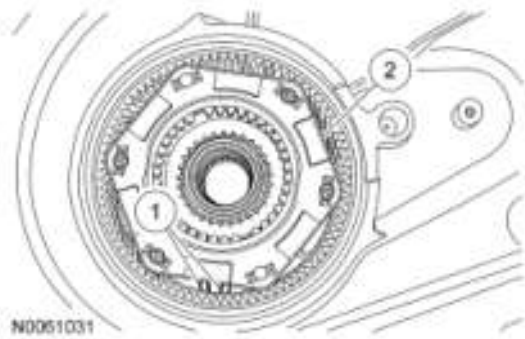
Identifying Snap Ring And Front Planetary Gear Set Assembly
